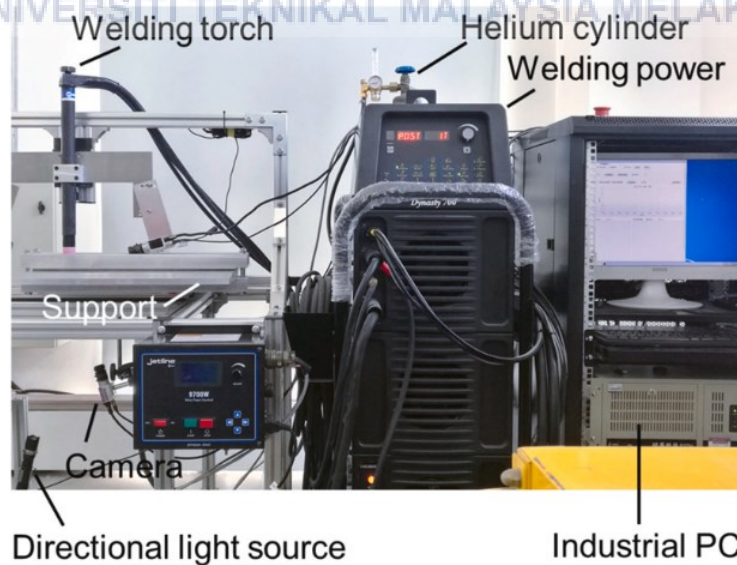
Weld penetration detection system with digital camera (Peng et al., 2021)
